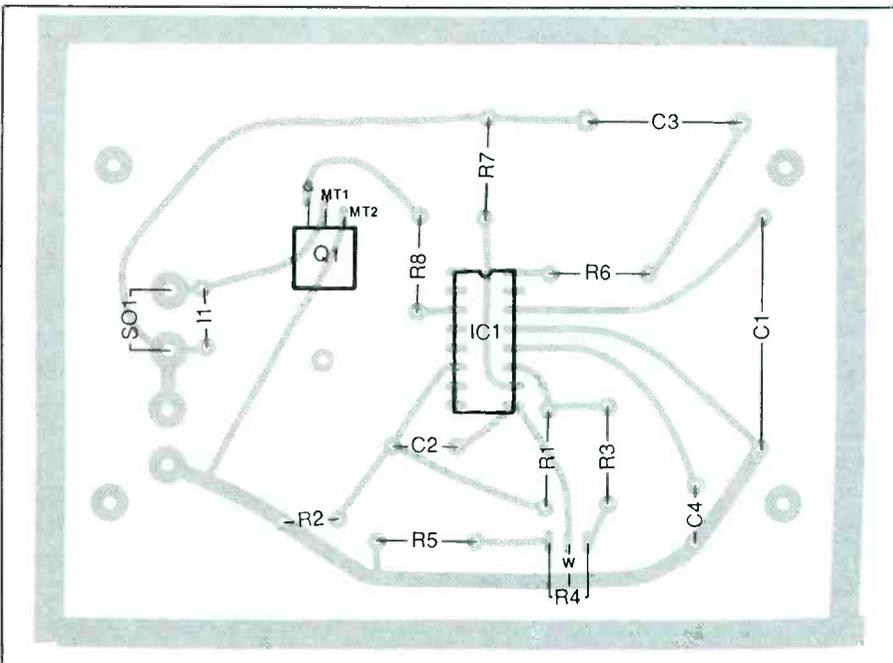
The wiring diagram for the pc board. Use this layout as a guide to component placement if you wire the circuit on perforated board.
